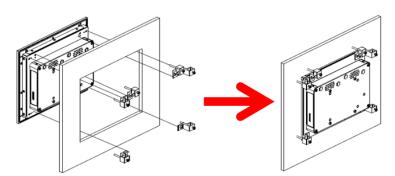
Screwing the Panel PC firmly to the panel frame.
